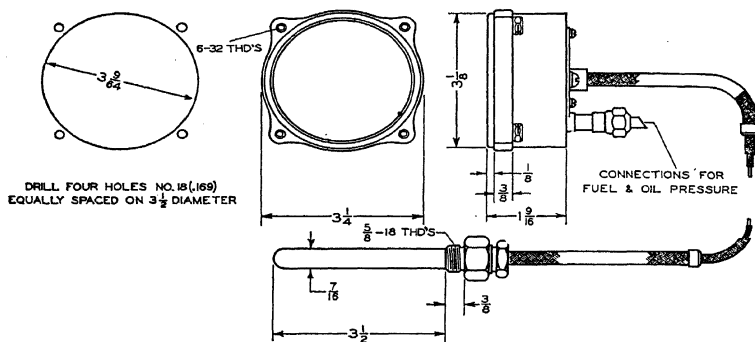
KOLLSMAN ENGINE GAUGE UNIT
